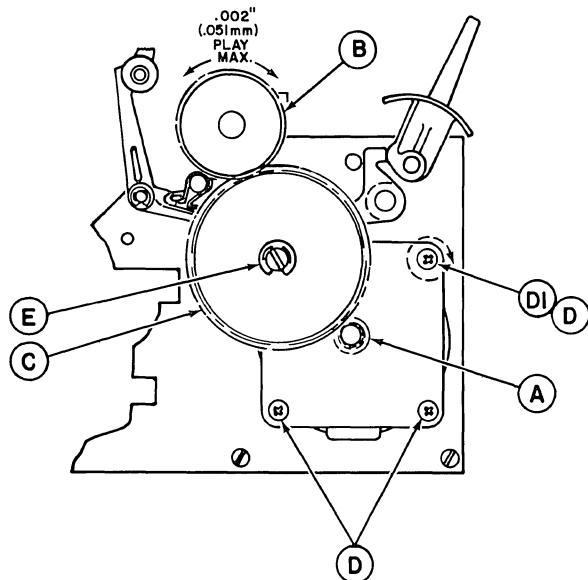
PAPER FEED GEAR ADJUSTMENTS
